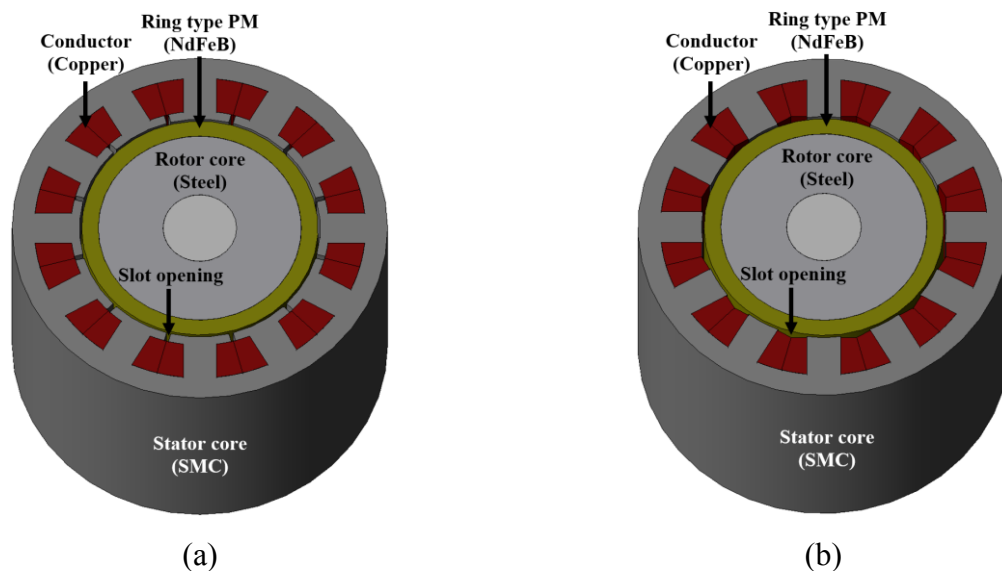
Isometric view of 12 slots and 8-pole with ring-type Halbach-array cold spray rotor PM and SMC stator core. (a) with stator tooth tip (b) without stator tooth tip
